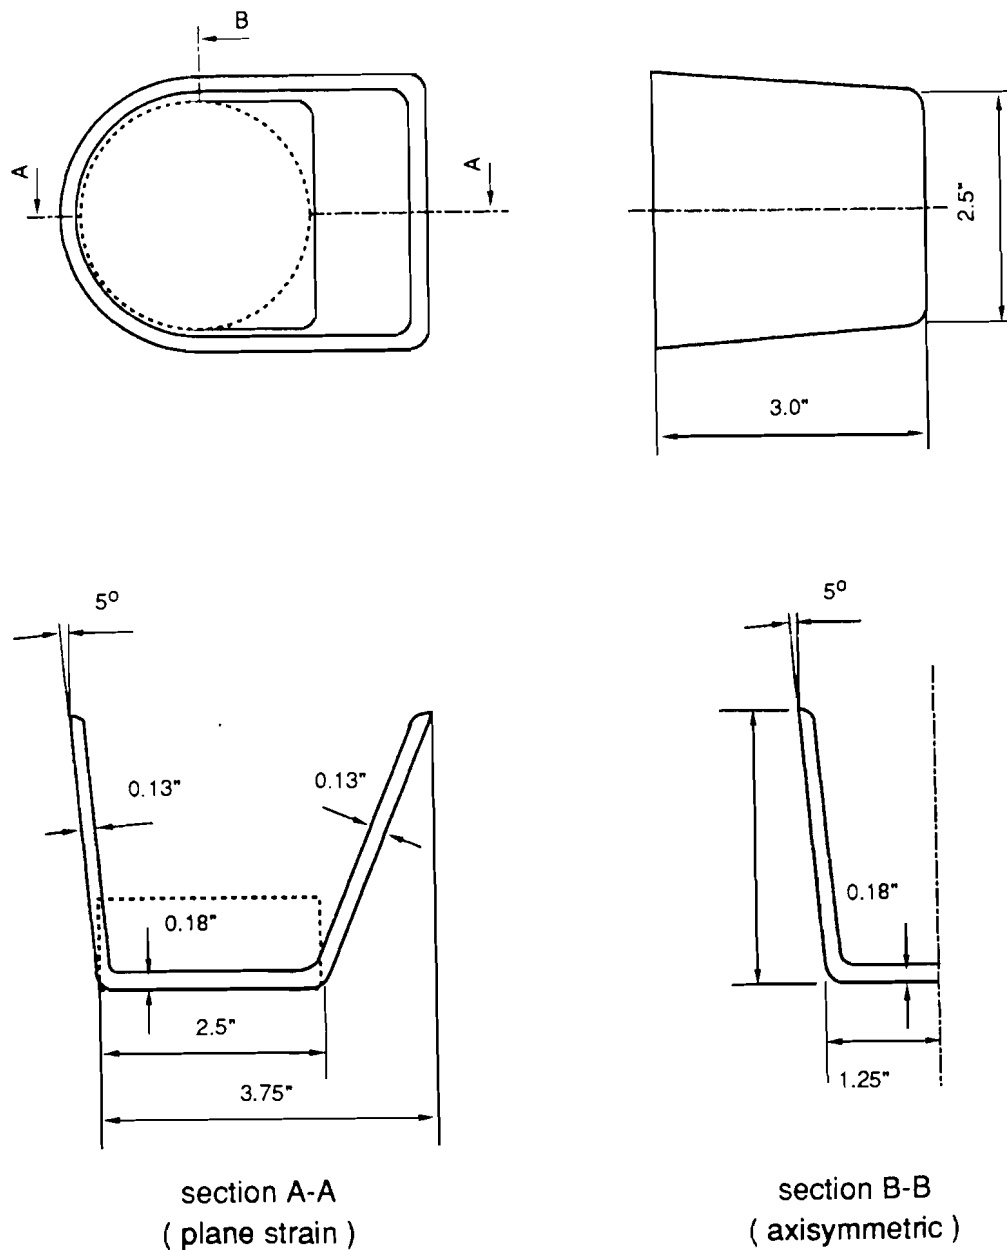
Dimensions of the bucket used for evaluation of forging lubricants [1]. The billet before deformation is indicated with broken lines and was 2.5 in diameter \times 1.4 in height.
